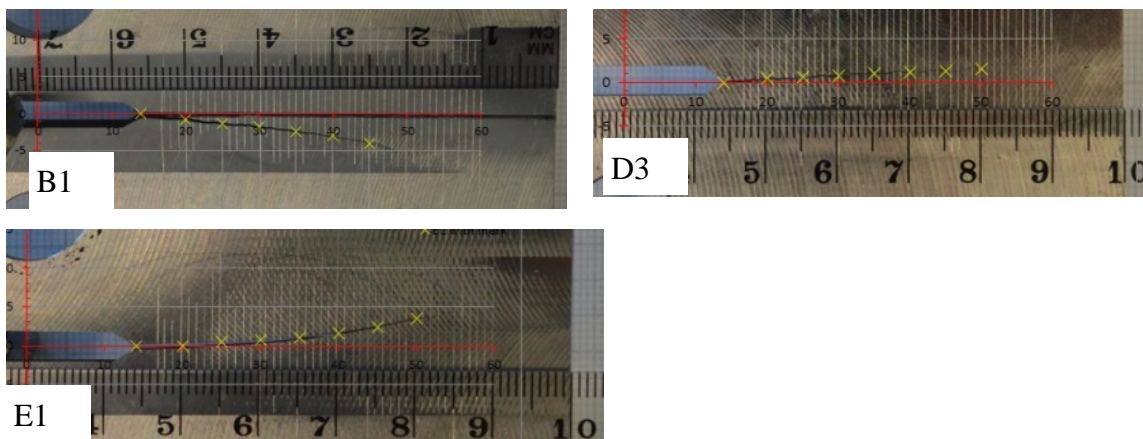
Three examples for fatigue crack deviation angles, B1, E1 and D3 specimens.
